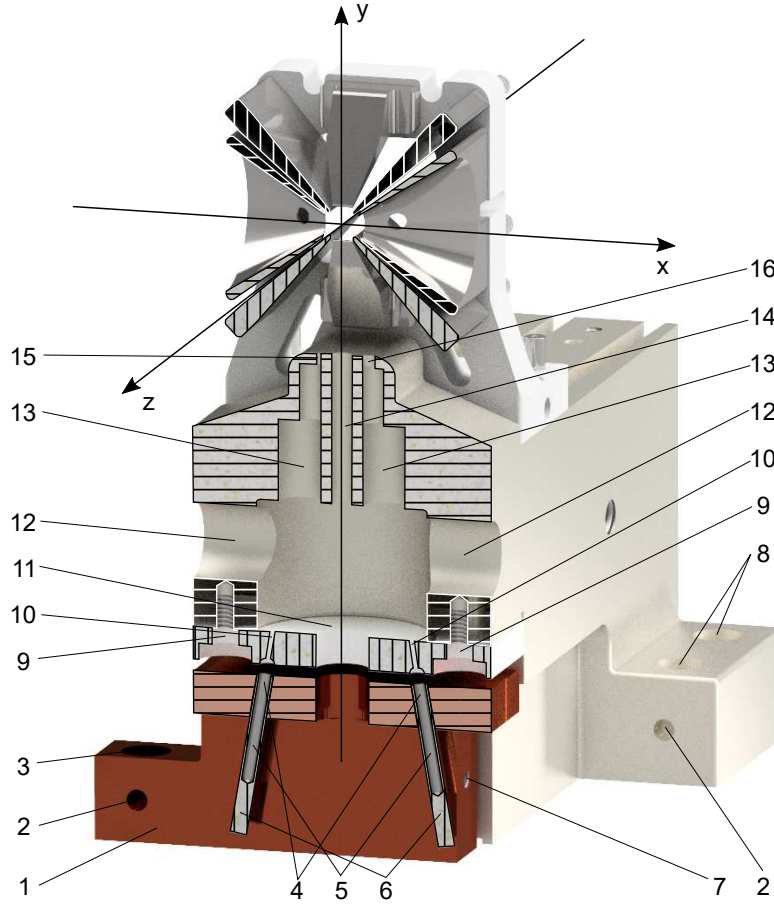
CAD section of the ovens system for producing atomic beams of neutral Barium. (1) Copper heat-sink. (2) Venting holes. (3) Screw passing hole for fixing the heat-sink on the flange. (4) Cold upper part of the (5) chimney tubes. (6) Tube stripes for the electric connection. (7) Threaded hole for the ground-connecting the heat-sink. (8) Screw passing holes for fixing the base on the flange. (9) Pipes and (10) screw passing holes of the cold ceramic (11) skimmer. (12) Inspection view-ports of the (13) cylindrical oven cavities. (14) Anti-sputter wall for protecting the vertical optical access. (15) and (16) Output holes.
